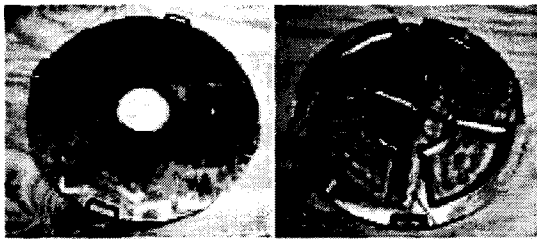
Feature of the steel based mold with newly suggested method for spin casting
